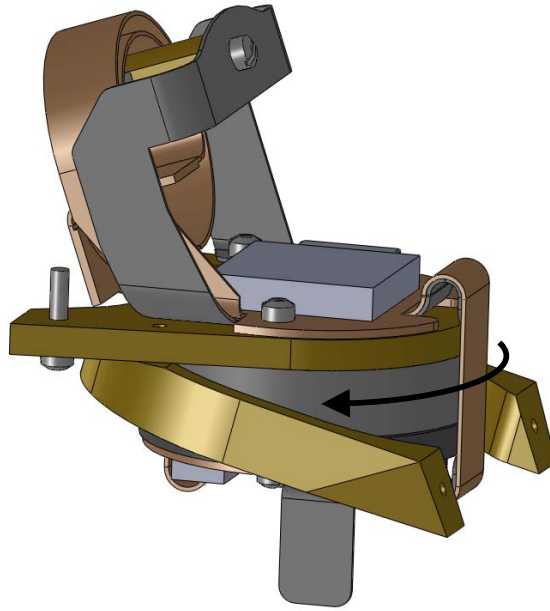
Millibot module. This assembly is repeated for each joint. The electropermanant stepper motor rotates the rotor joiner relative to the rest of the assembly, as shown. The rotor joiner connects to the processor bushing of its neighbor using two screws. See Figure 6-4 for an exploded view.
